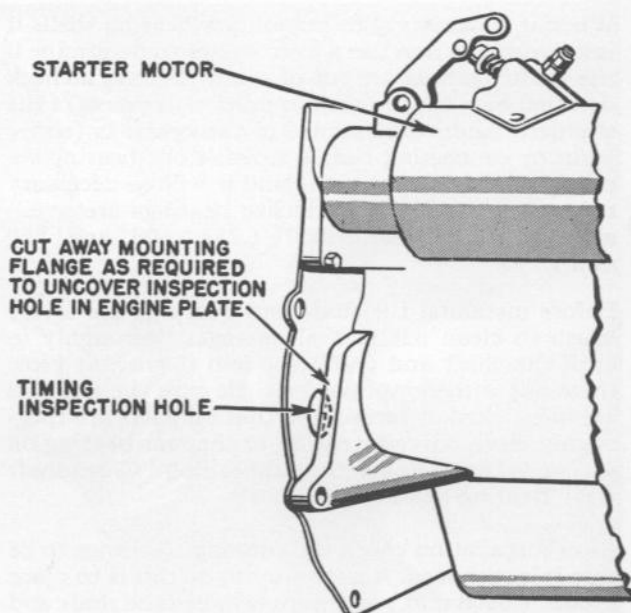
UNCOVERING TIMING INSPECTION HOLE
